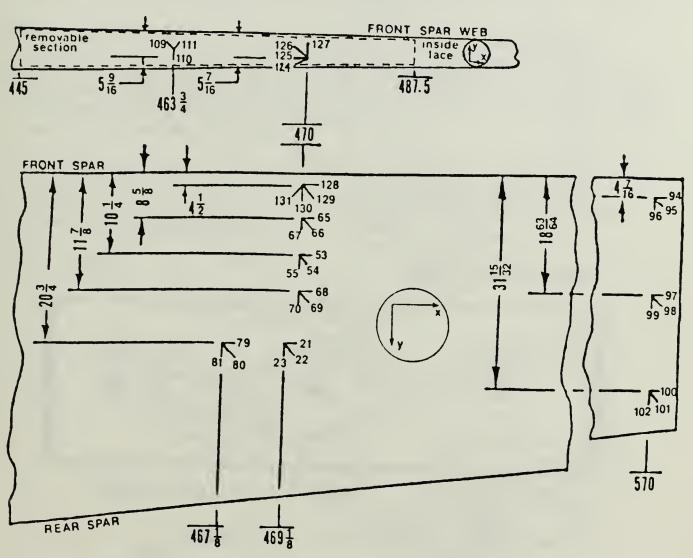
A P2V Starboard Wing, Strain Gage Loacations, Bottom of Test Section
